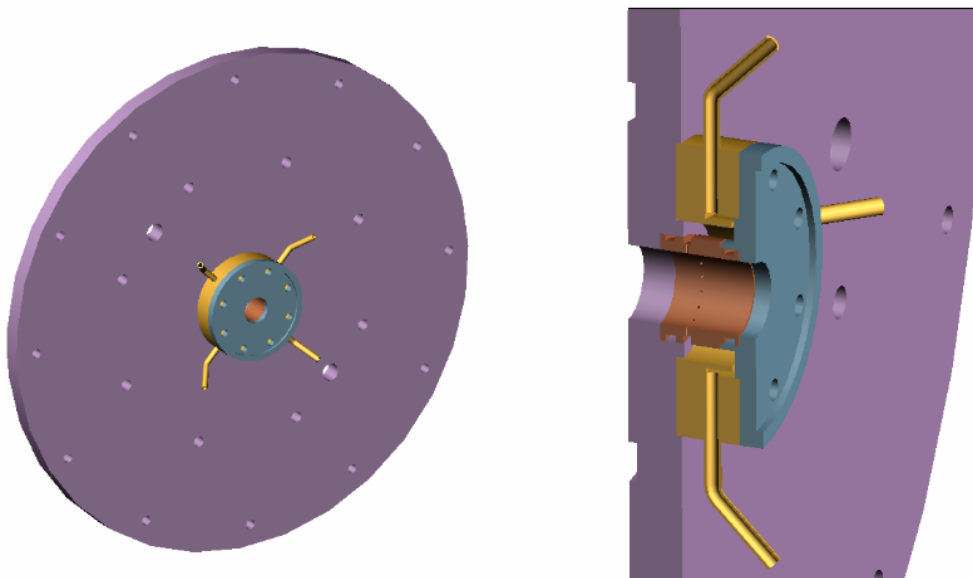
Left: Image of the Fuel injector assembly. Right: Section view showing the two stage fuel injection process.
